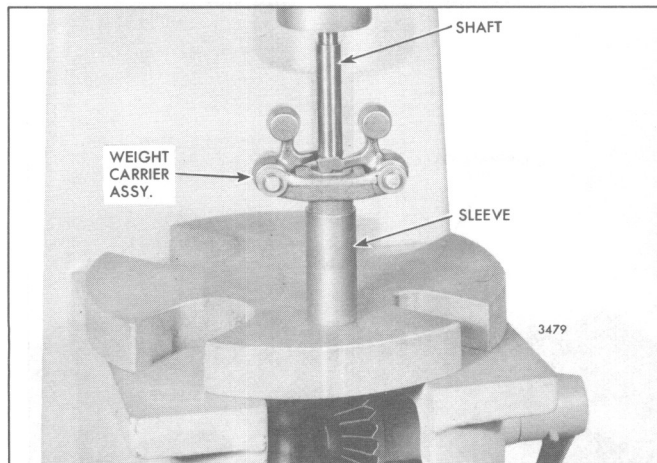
Removing Governor Weight Shaft from Weight Carrier Assembly
